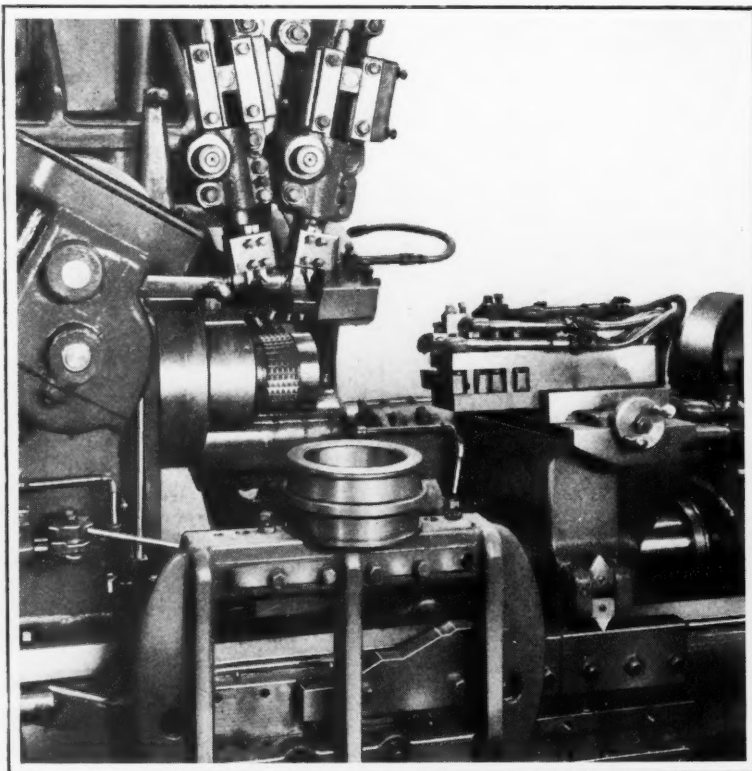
Tooling Used in Machining Outside Surfaces of Large Roller-bearing Inner Races
